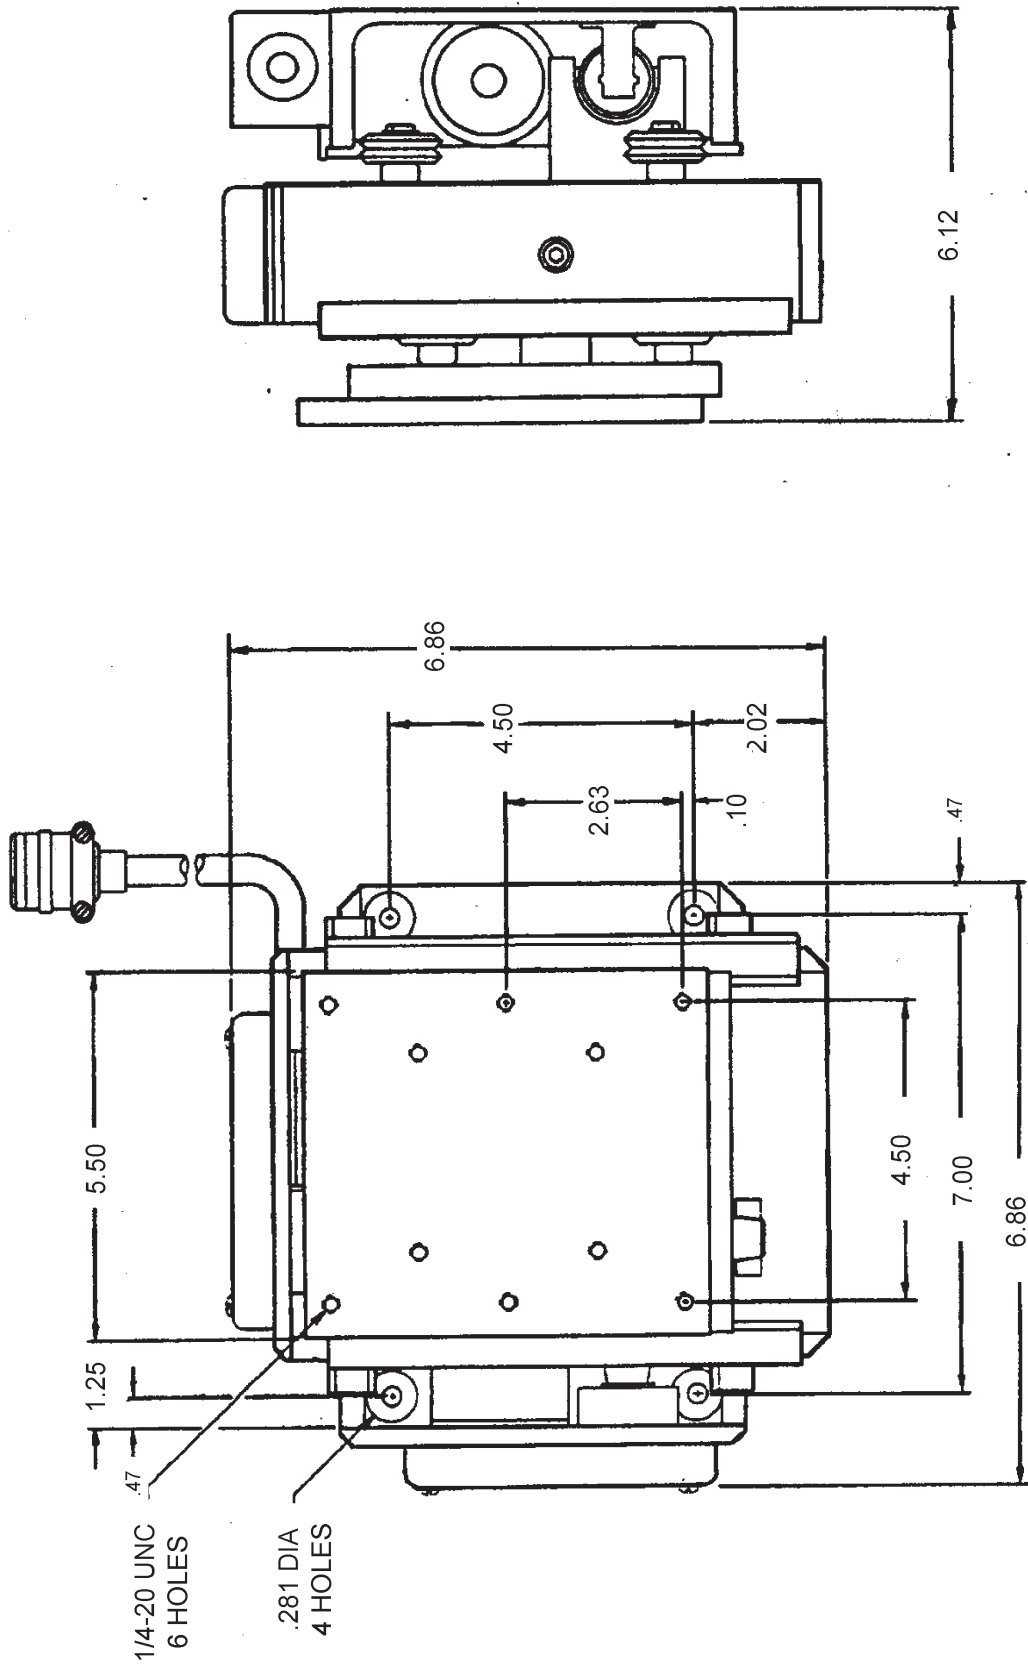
ST40 CROSS-SLIDE MOUNTING DIMENSIONS
